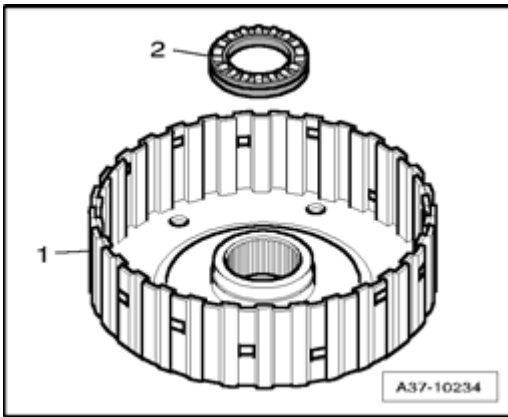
Inner Plate Carrier "B" And Axial Needle Bearing
